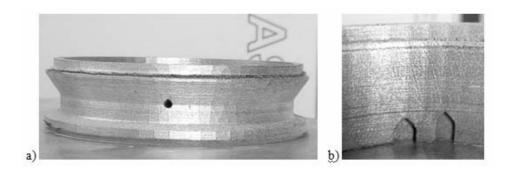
Redesigned part SLM-processed: a) external profile walls; b) fixing channels for assembling this part into tyres drum.
